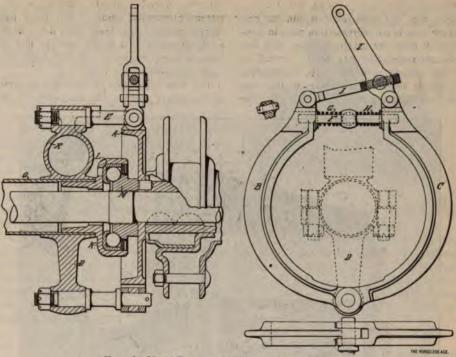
HUB BRAKE AND REAR AXLE BEARING.
